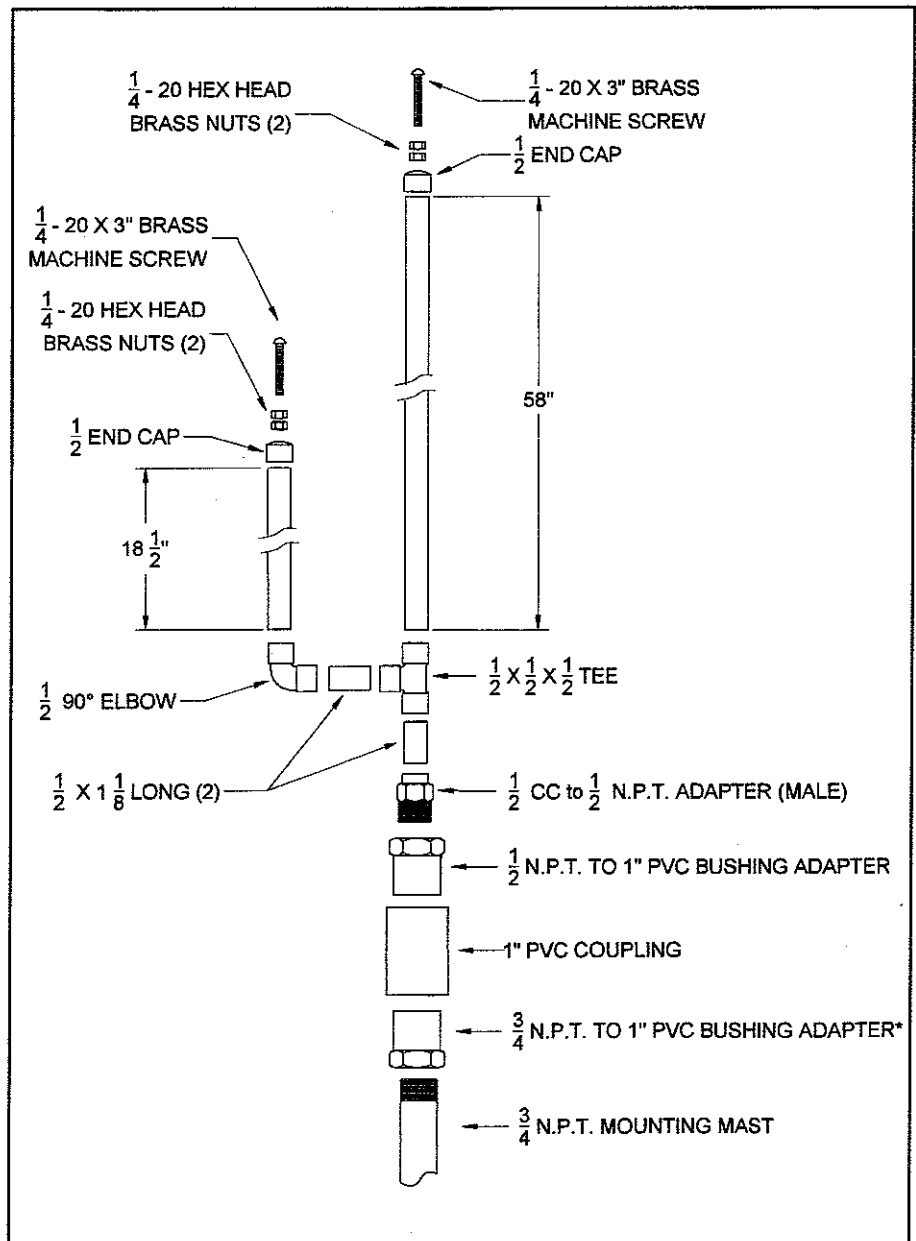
Parts assembly and dimensions for a 2 meter J-pole.
